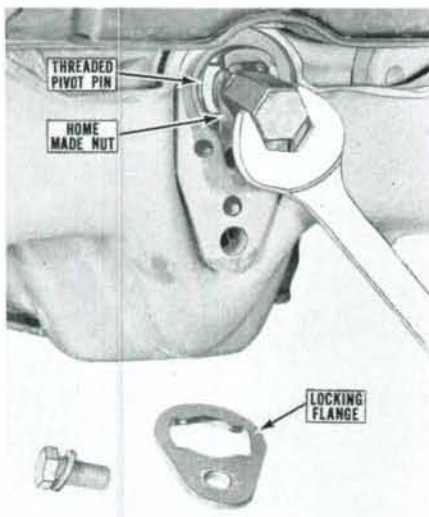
Removing threaded service type front axle pivot pin with home made nut. Nut is made by welding lugs on hex bar. Bar should fit inside diameter of pivot pin and lugs be shaped to engage notches in end of pin.
